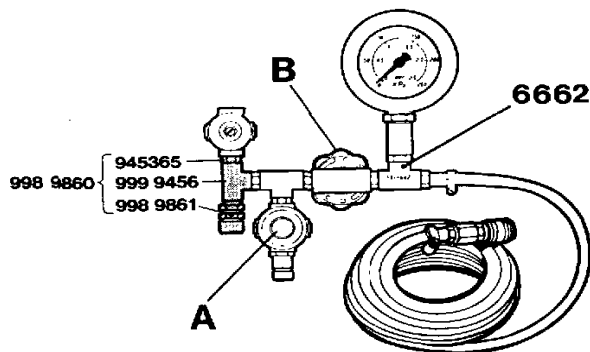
Mounting of kit 998 9860 on the pressure-testing device 6662 (Sweden only).
